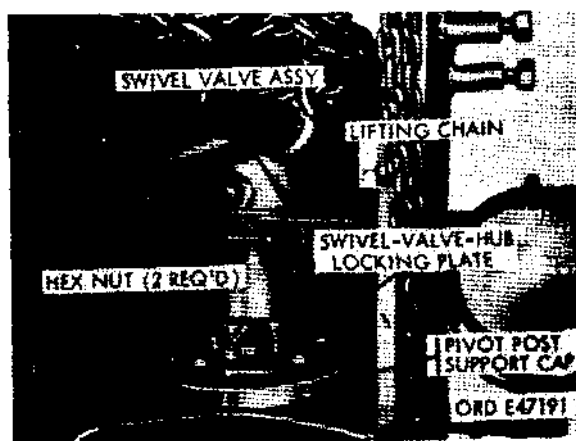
Front view of upper end of pivot post with swivel in raised position.
